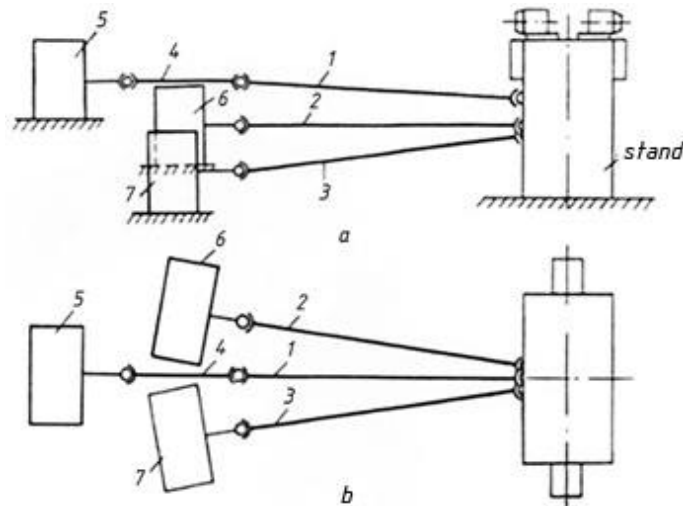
Scheme of the input side of the mill: a – main view; b – top view; 1-3 – main universal spindles; 4 – intermediate horizontal spindle; 5-7 – drive electric motors
